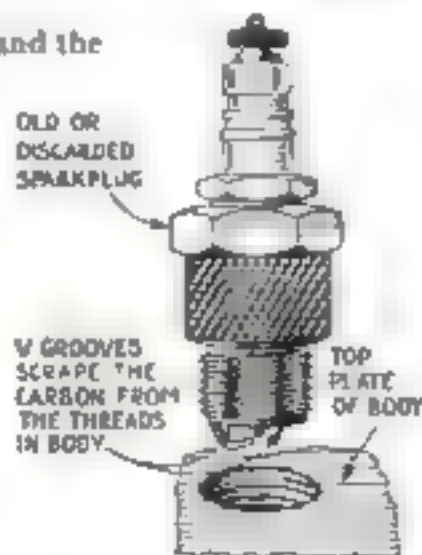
Using an old spark plug to remove carbon from threads of spark plug hole.
